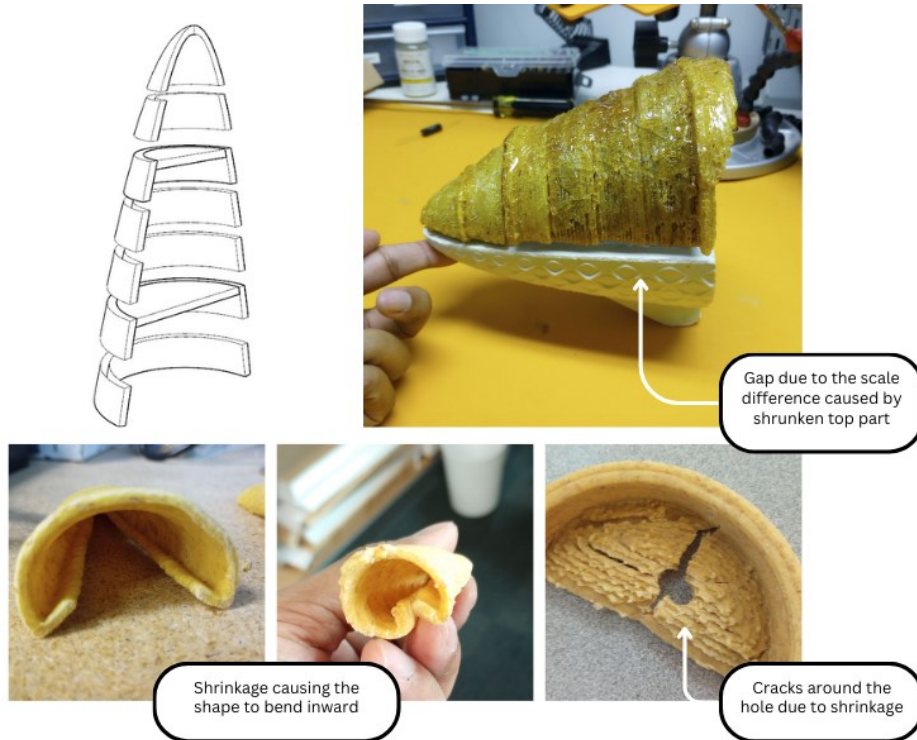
Printing the shape with multiple parts (top left) and gluing them together and applying pine resin coating (top right); Annotations of shrinking effects over a month (bottom)
